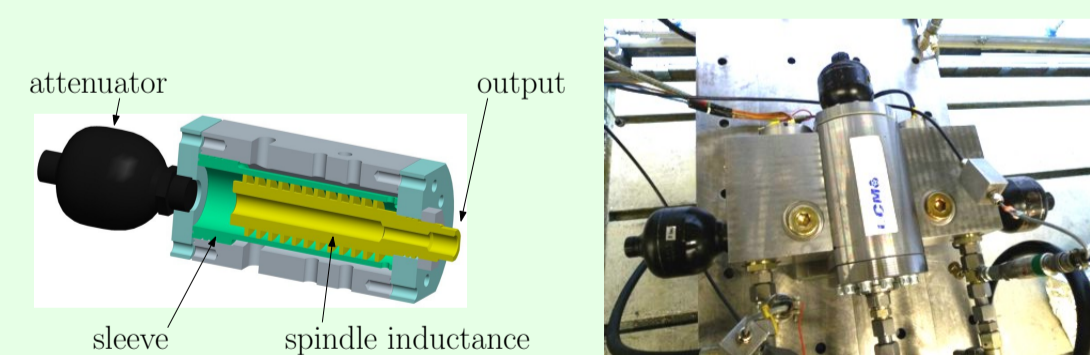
Prototype HBC021 with a threaded spindle inside the valve block
